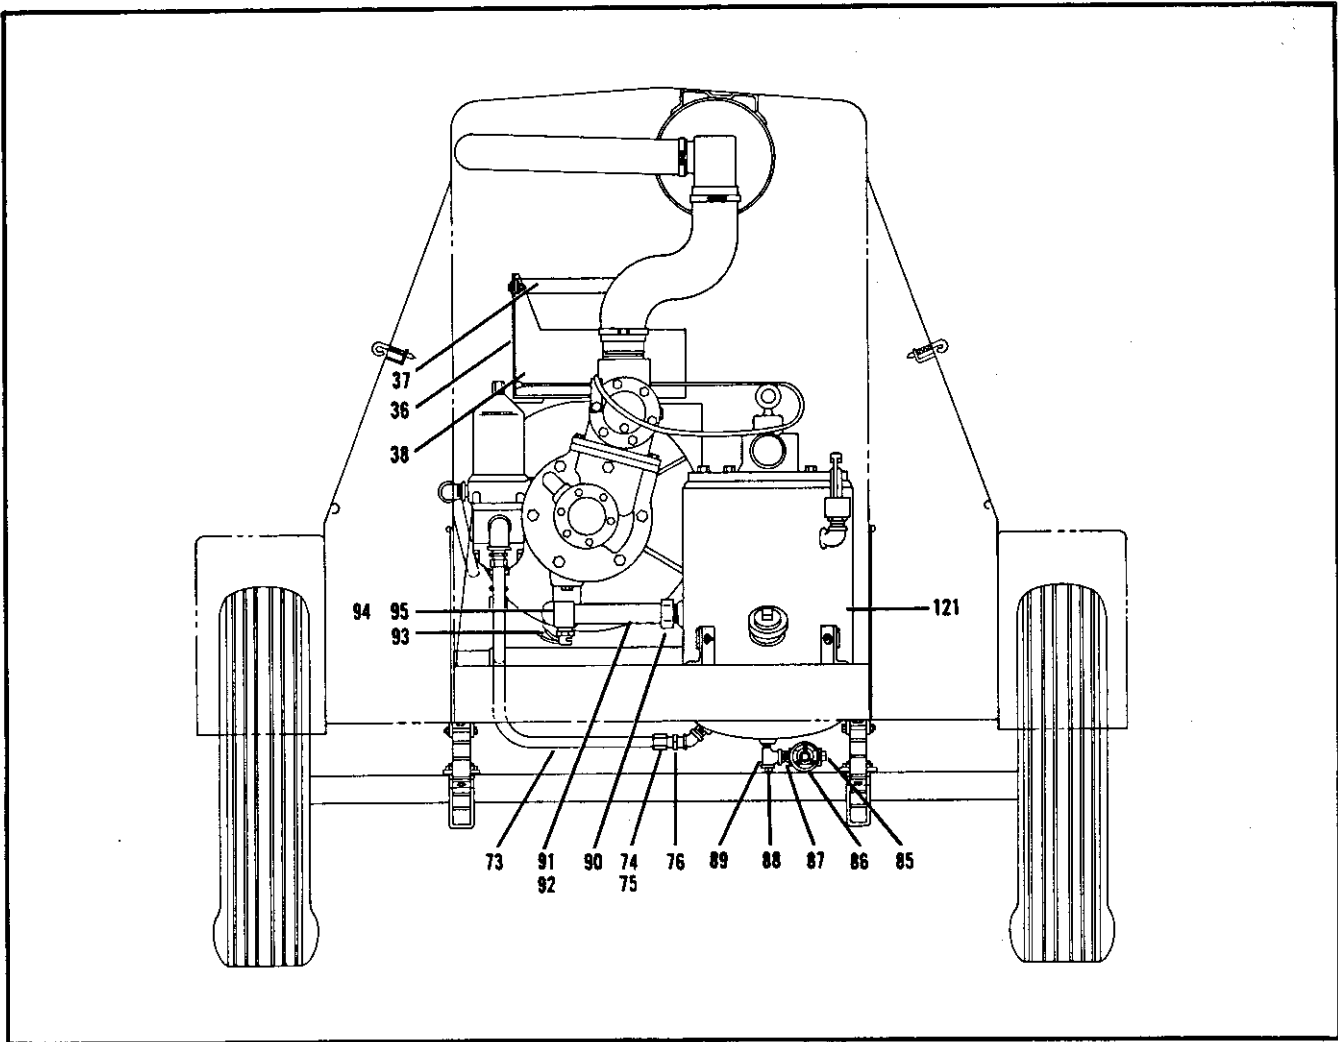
Compressor unit assembly, Model 4M125PVC (Sheet 3 of 4)
